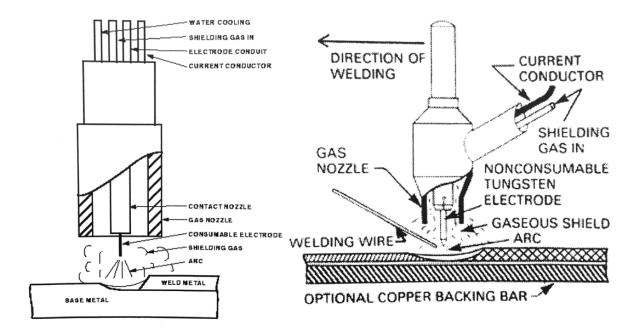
MIG (left) and TIG (right) welding [27].
